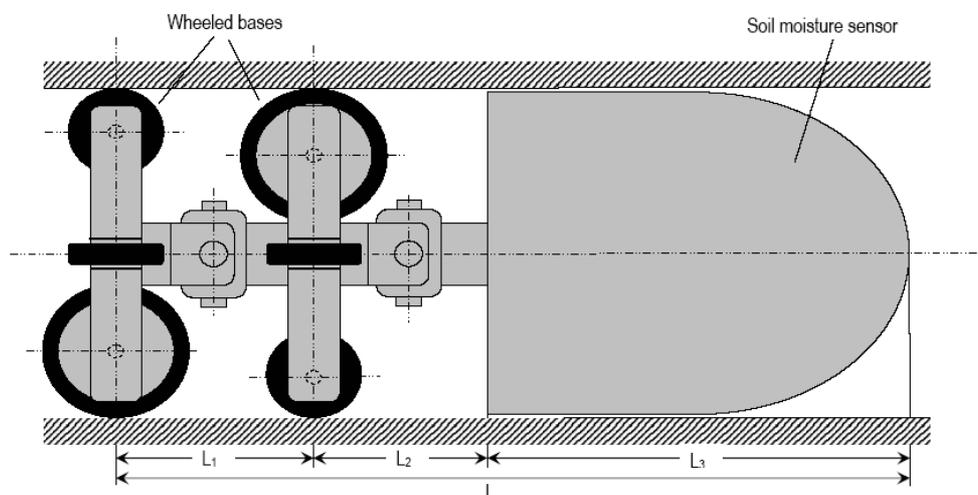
The mechanical drawing of the mobile platform that monitors soil moisture.
